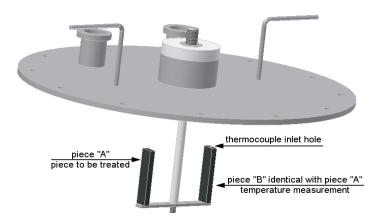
Experimental arrangement. Piece "A" is the piece to be treated; Piece "B" is an identical piece with Piece "A" located in symmetrical position with respect to the chamber axis.
